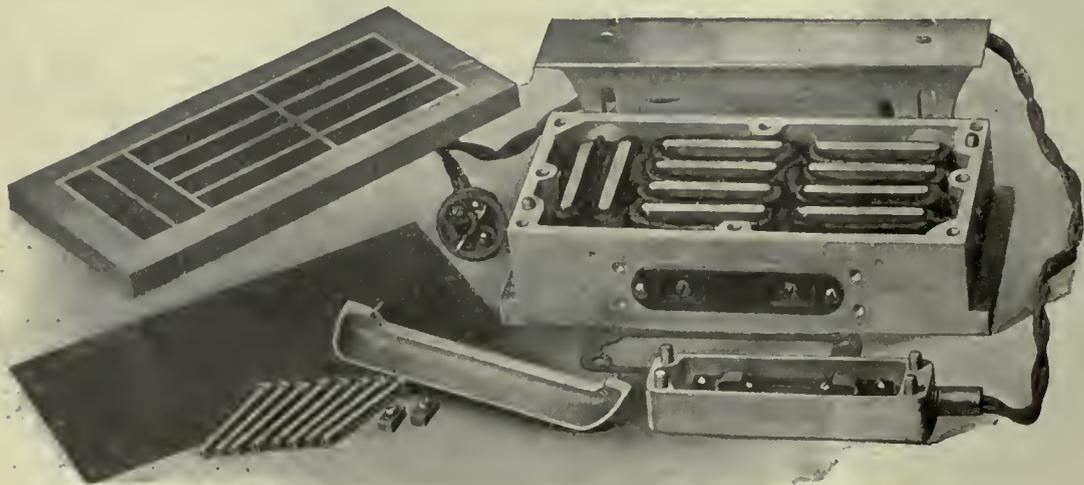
The same Chuck as used by toolmakers, disassembled.
